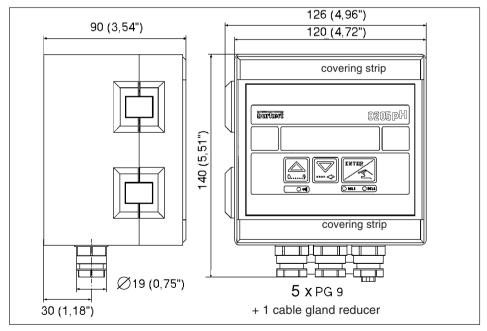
Dimensions pH controller type 8205 wall-mounted version
